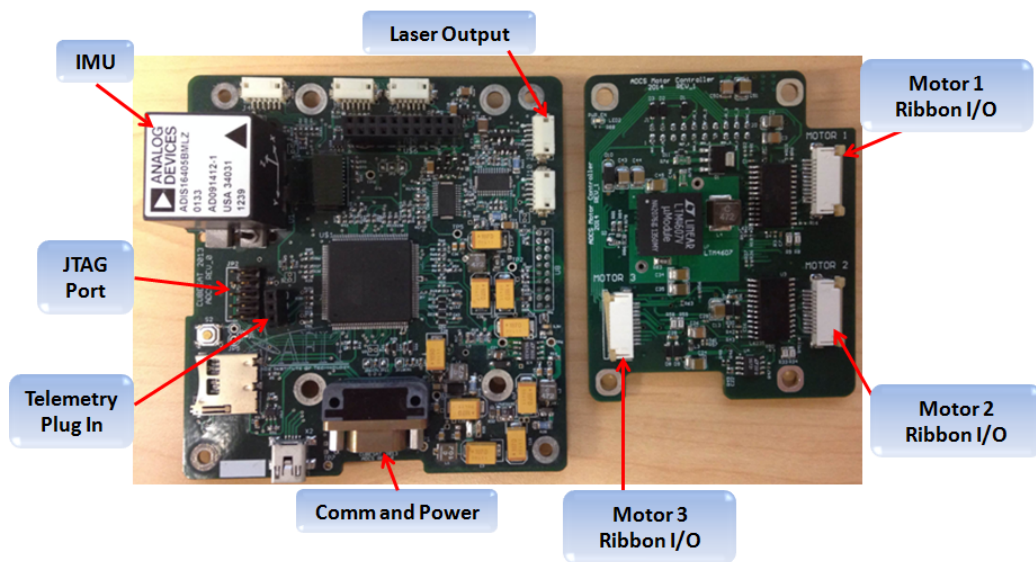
ADCS Circuit Board (left) Motor Controller Daughter Board (right)
